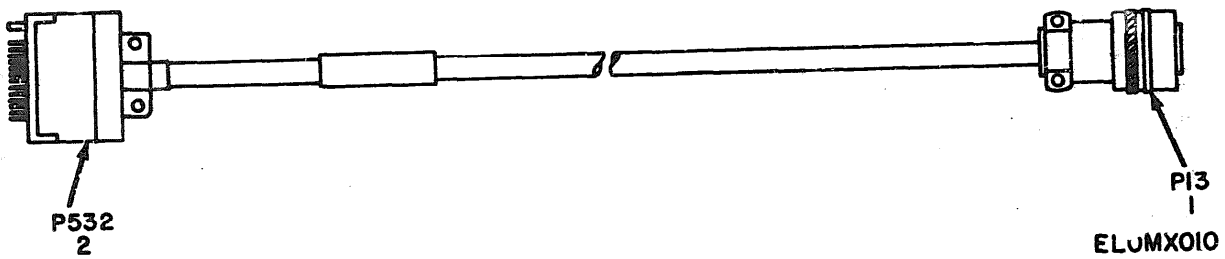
Cable Assembly, Special Purpose, Electrical, CX-7564/ASM-63 998936-01-01 (W7).
